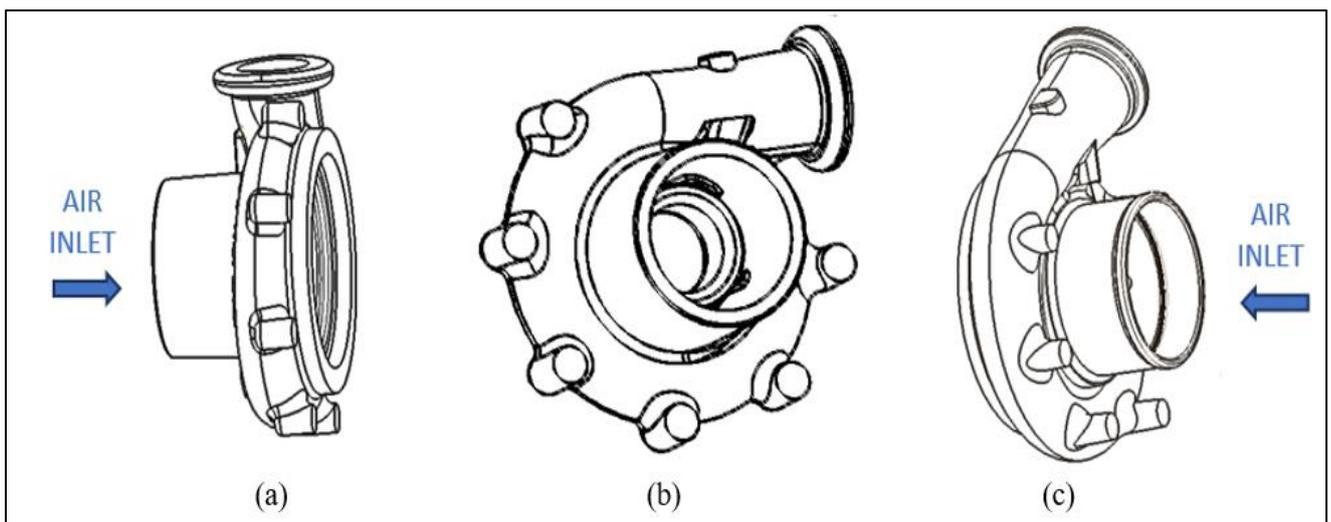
(a) Bearing Housing Side, (b) Outer Side, (c) Air Inlet Side
